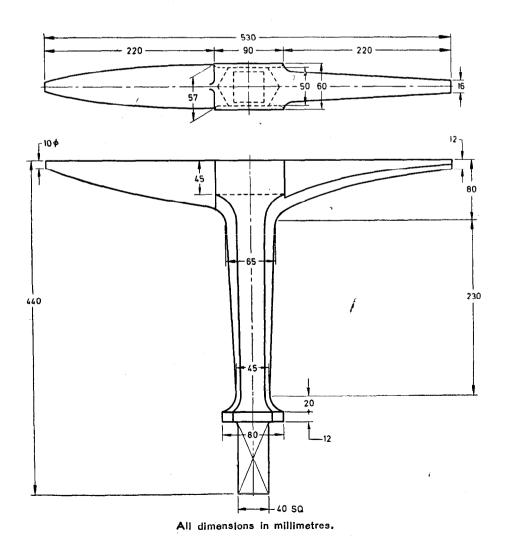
DIMENSIONS FOR BICK-IRON, TYPE B
